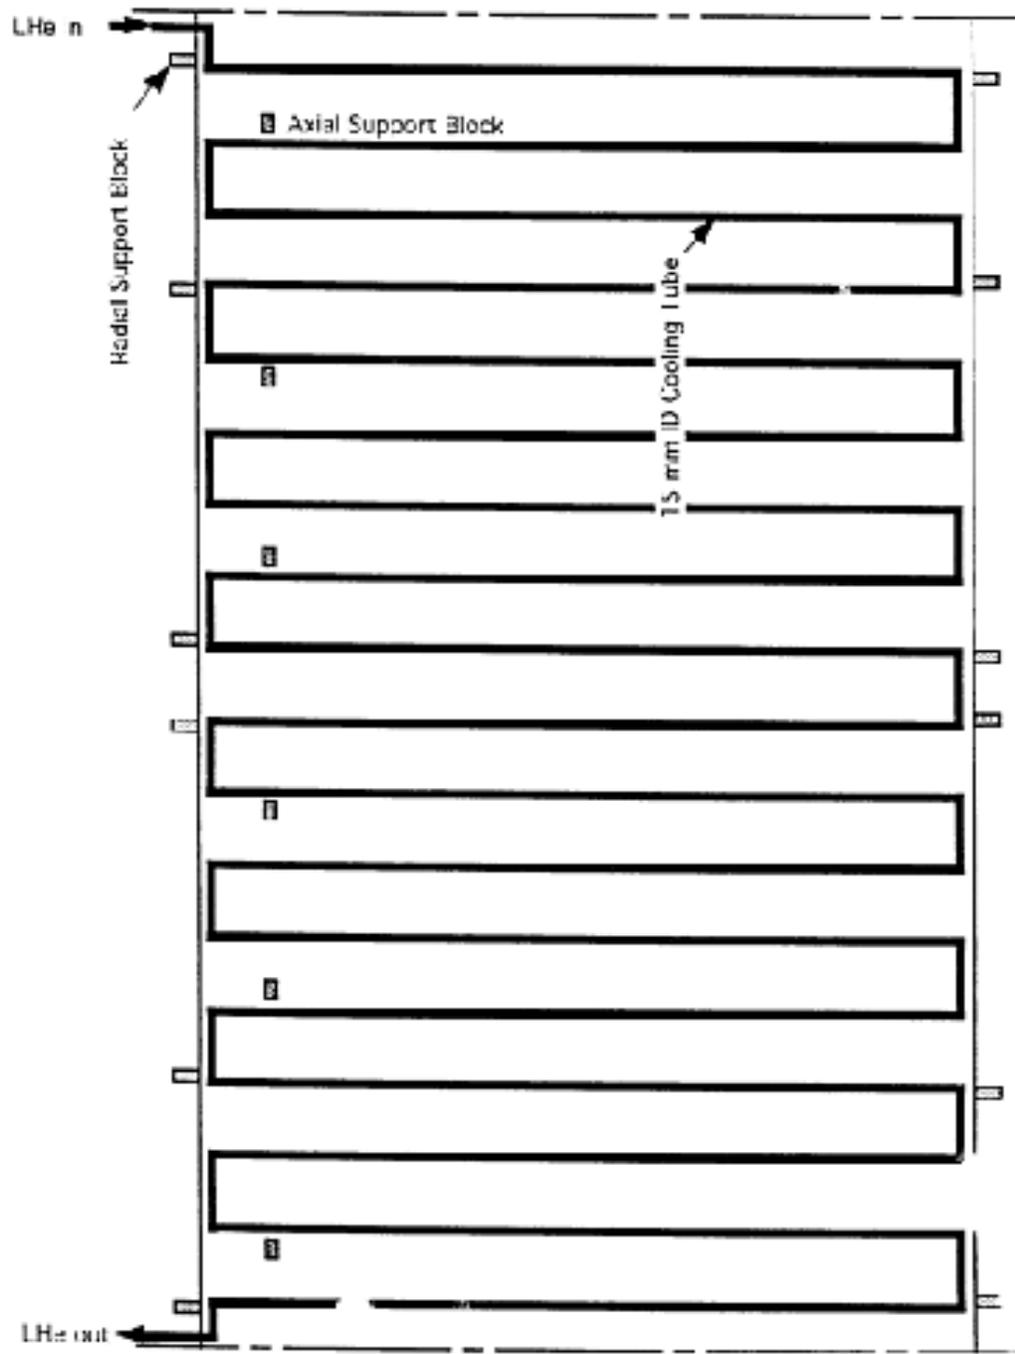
Routing of liquid helium cooling tube on the support cylinder.
